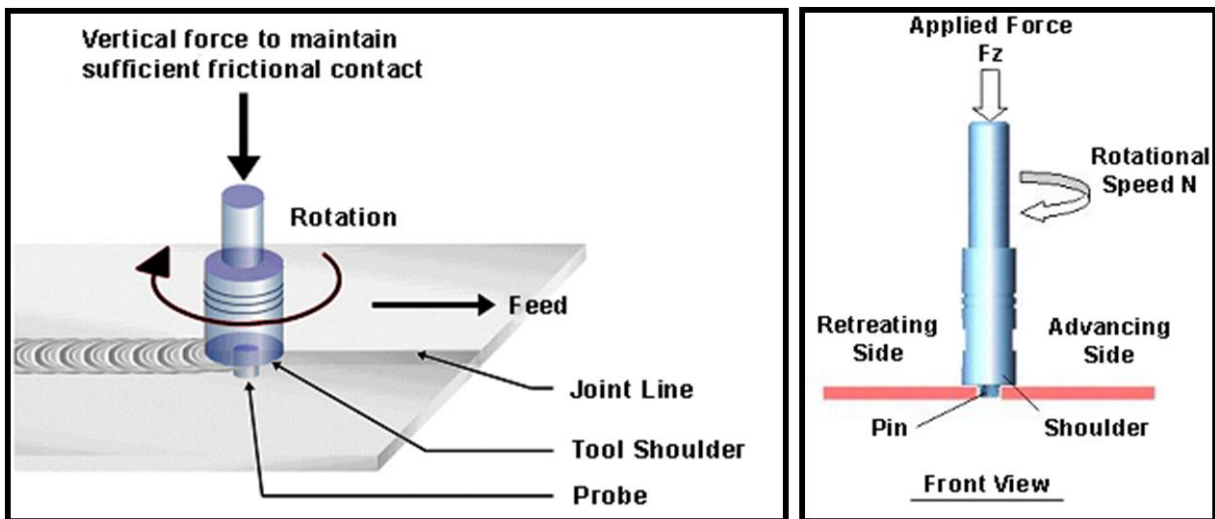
Friction stir weld process geometry ^[1]
